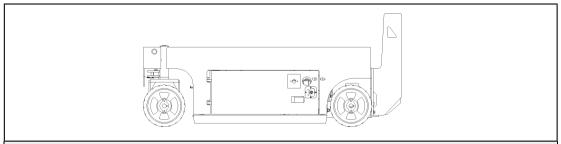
Pothole protection system-Elevating of work platform-The pit fence is lowered completely.
